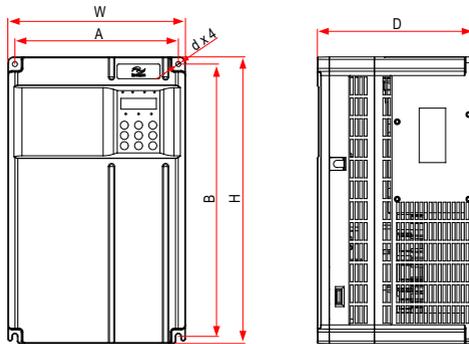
Exterior dimensions and mounting dimensions of 18.5-37 kW AC drive models
